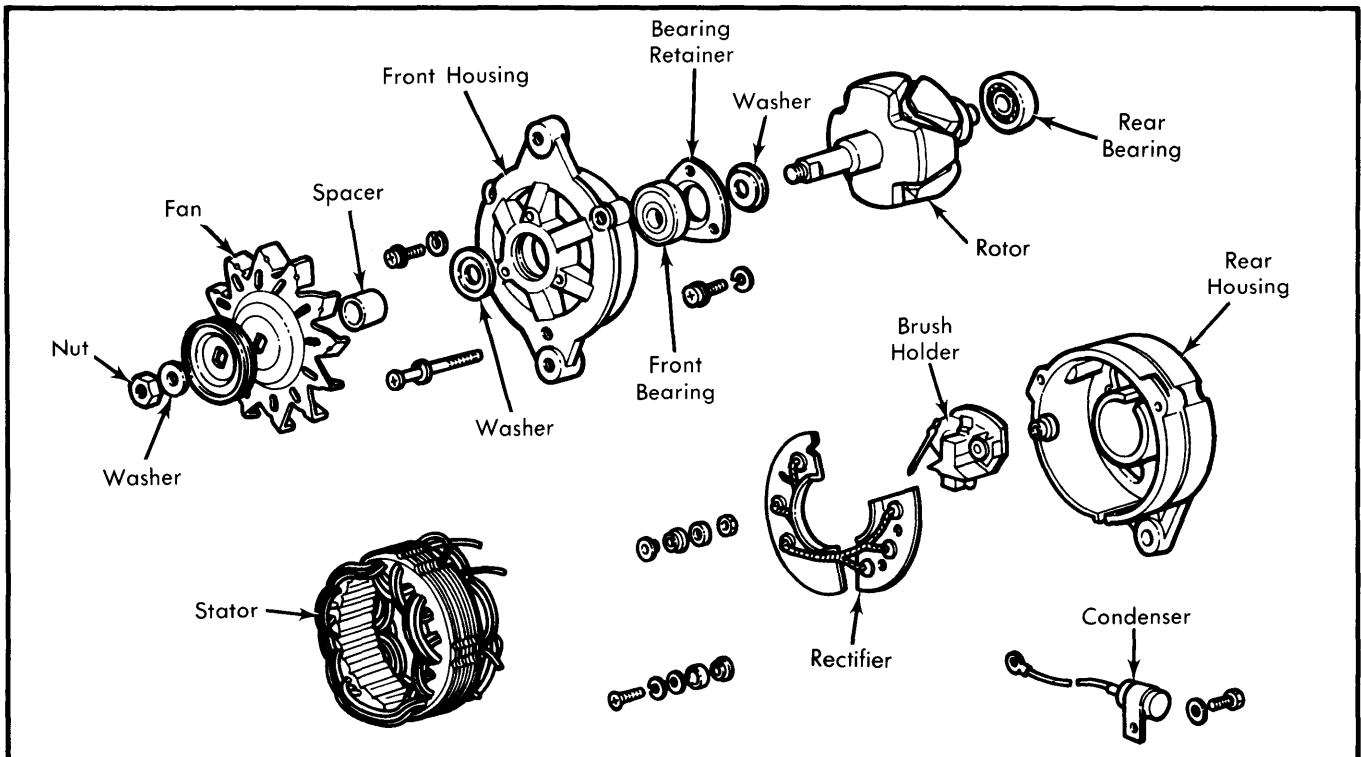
Exploded View of Mitsubishi Alternator (Courier Application Shown)
